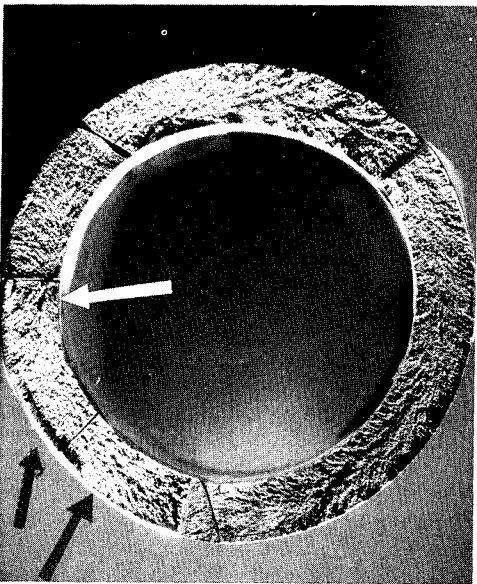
Macrograph of the lower fracture half of the pitch cone bolt as reconstructed by USARL-MD. Mag. 3.5x.
